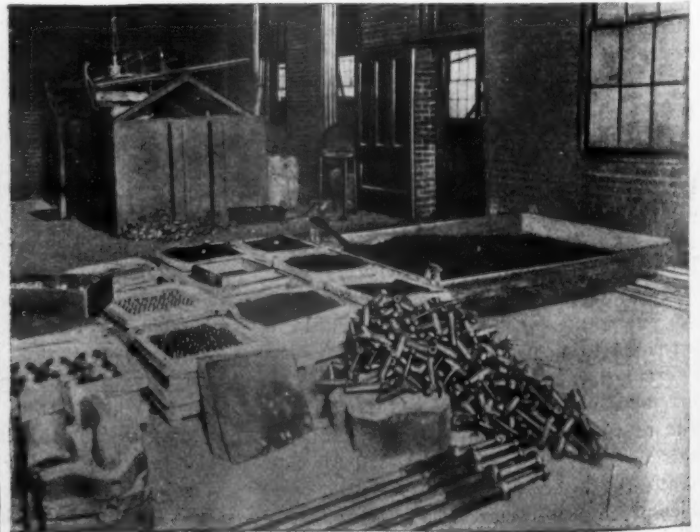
PACKING BEARING PARTS IN CHARCOAL FOR CASE-HARDENING
